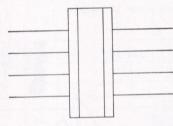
Sleeve type tubular rivet is hollow all the way through. No heads have been formed yet on the rivet shown above.
